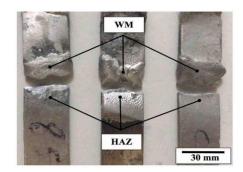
Top view of weld samples showing the fracture in the HAZ
